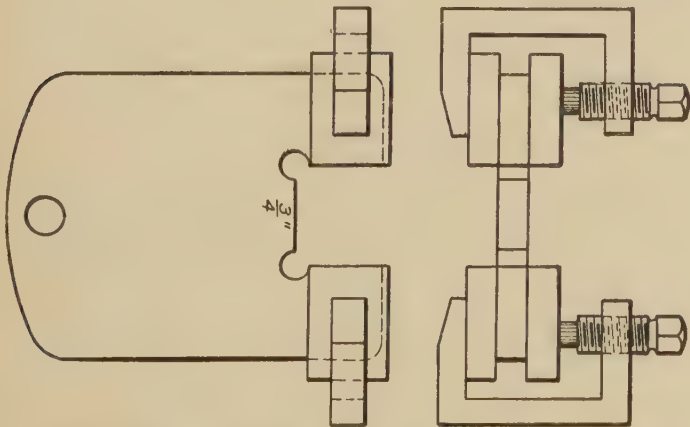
Method of Clamping Pieces on Gage to Prevent Rounding Edges
